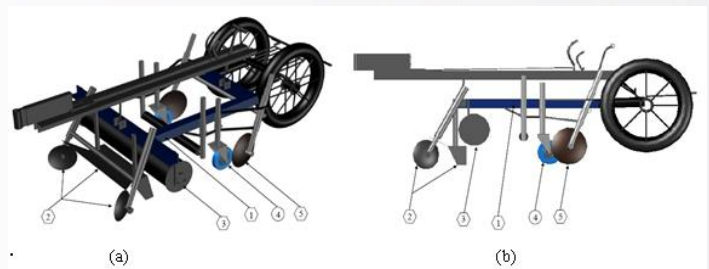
Component parts of the implement-type soil finisher, (a) perspective view and (b) side view.
